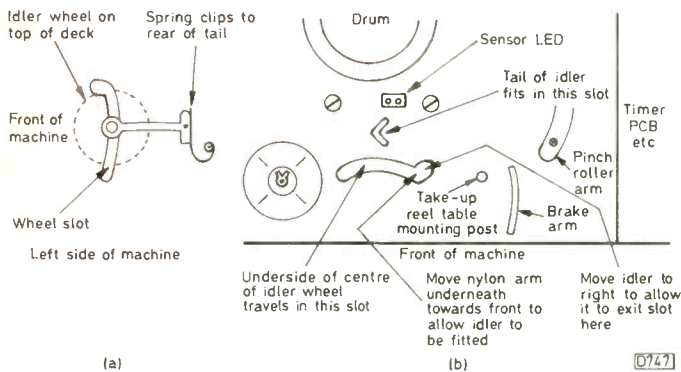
Replacing the idler. (a) Underside of the mechanism (simplified) showing the nylon arm and spring positions when fitting the idler. Machine is on its left-hand side. (b) A simplified view of the upper side of the mechanism, with the take-up reel table and the idler removed.
